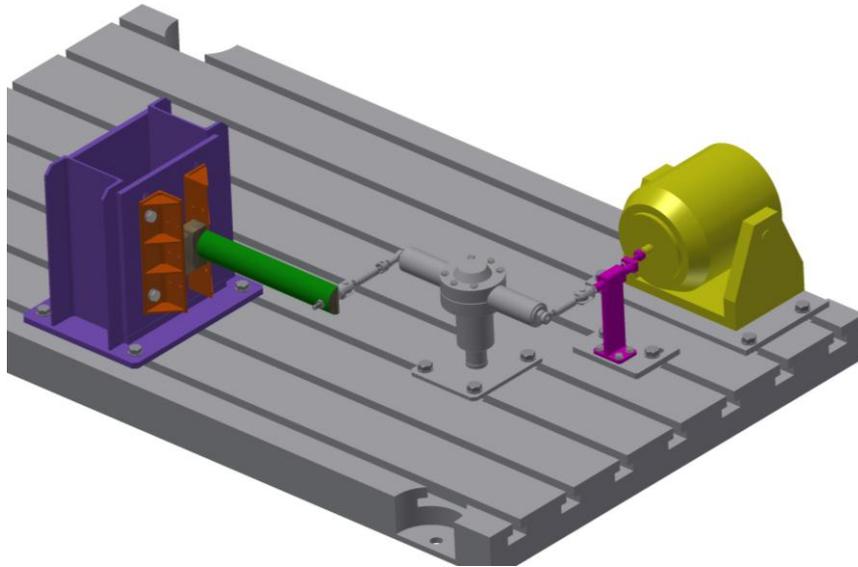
The assembly of bending testing machine. The main aim of this testing machine is to verify FE calculations.
